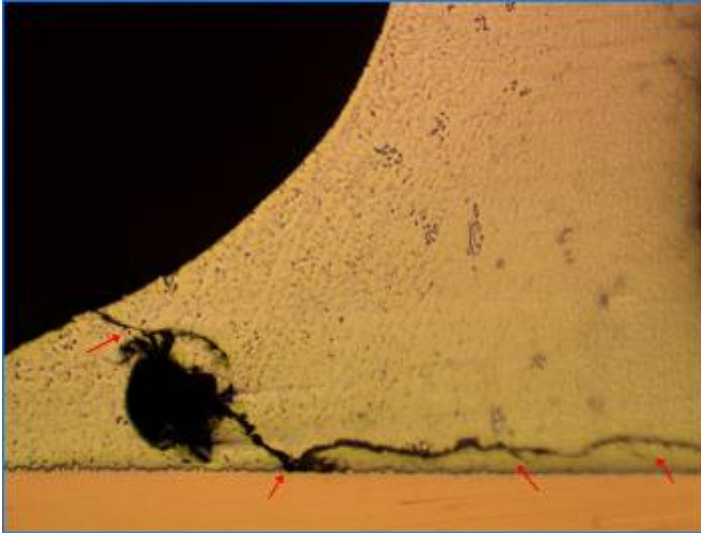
cross section, SN67, U52, left lead solder crack, 200xa
